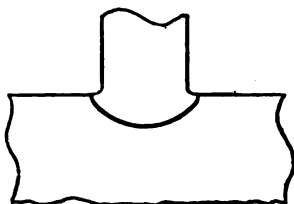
One method of applying a tee connection on a large pipe by welding.
